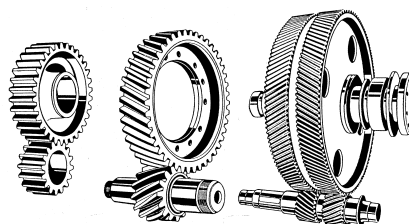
Examples of spur and helical gears, from Niemann and Winter (1985).
